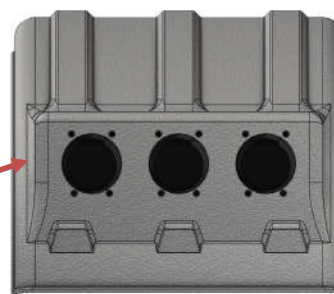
PASSENGER SIDE WIRING HOLE LOCATION.
